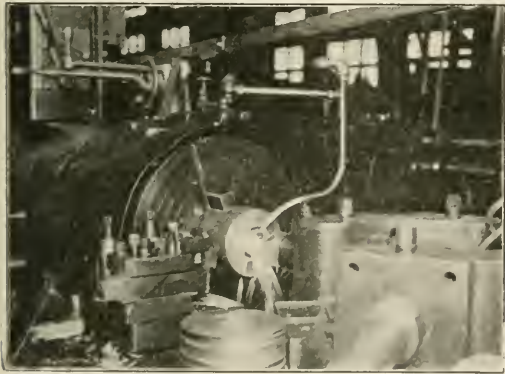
Powerful Turret Lathe Machining Crank Pin Collars
